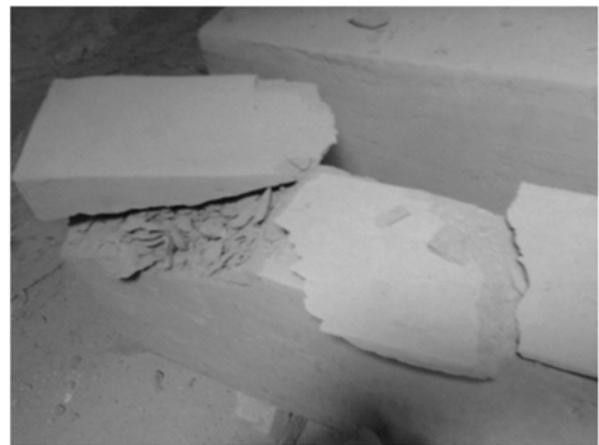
CRACKING OF CLAY BEAMS DURING FIRING IN THE LABORATORY KILN
